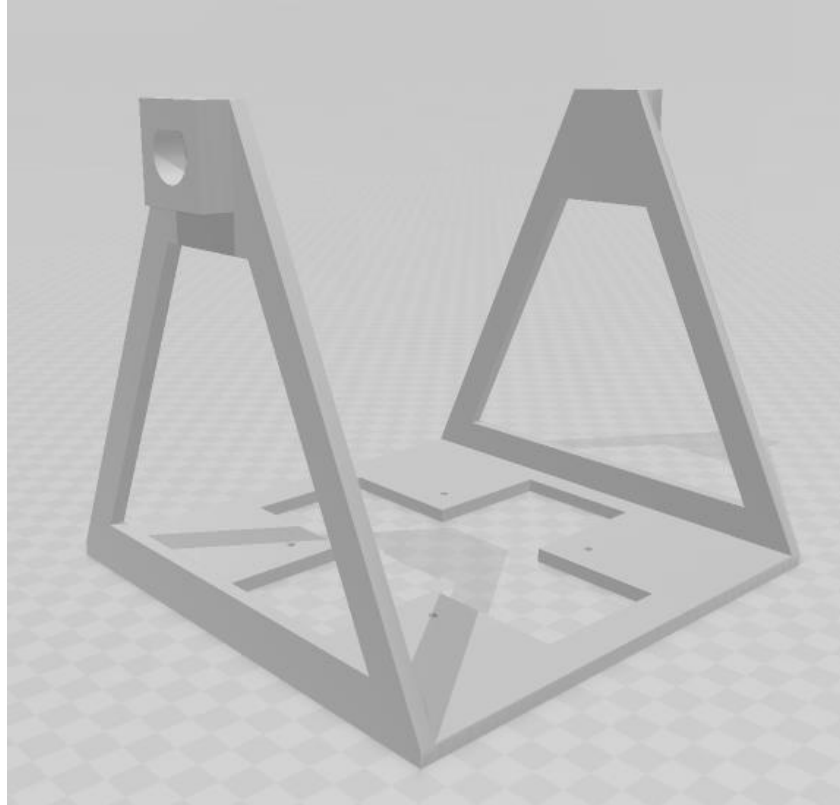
Swing-like holder design used to hold the solar tracking device.
